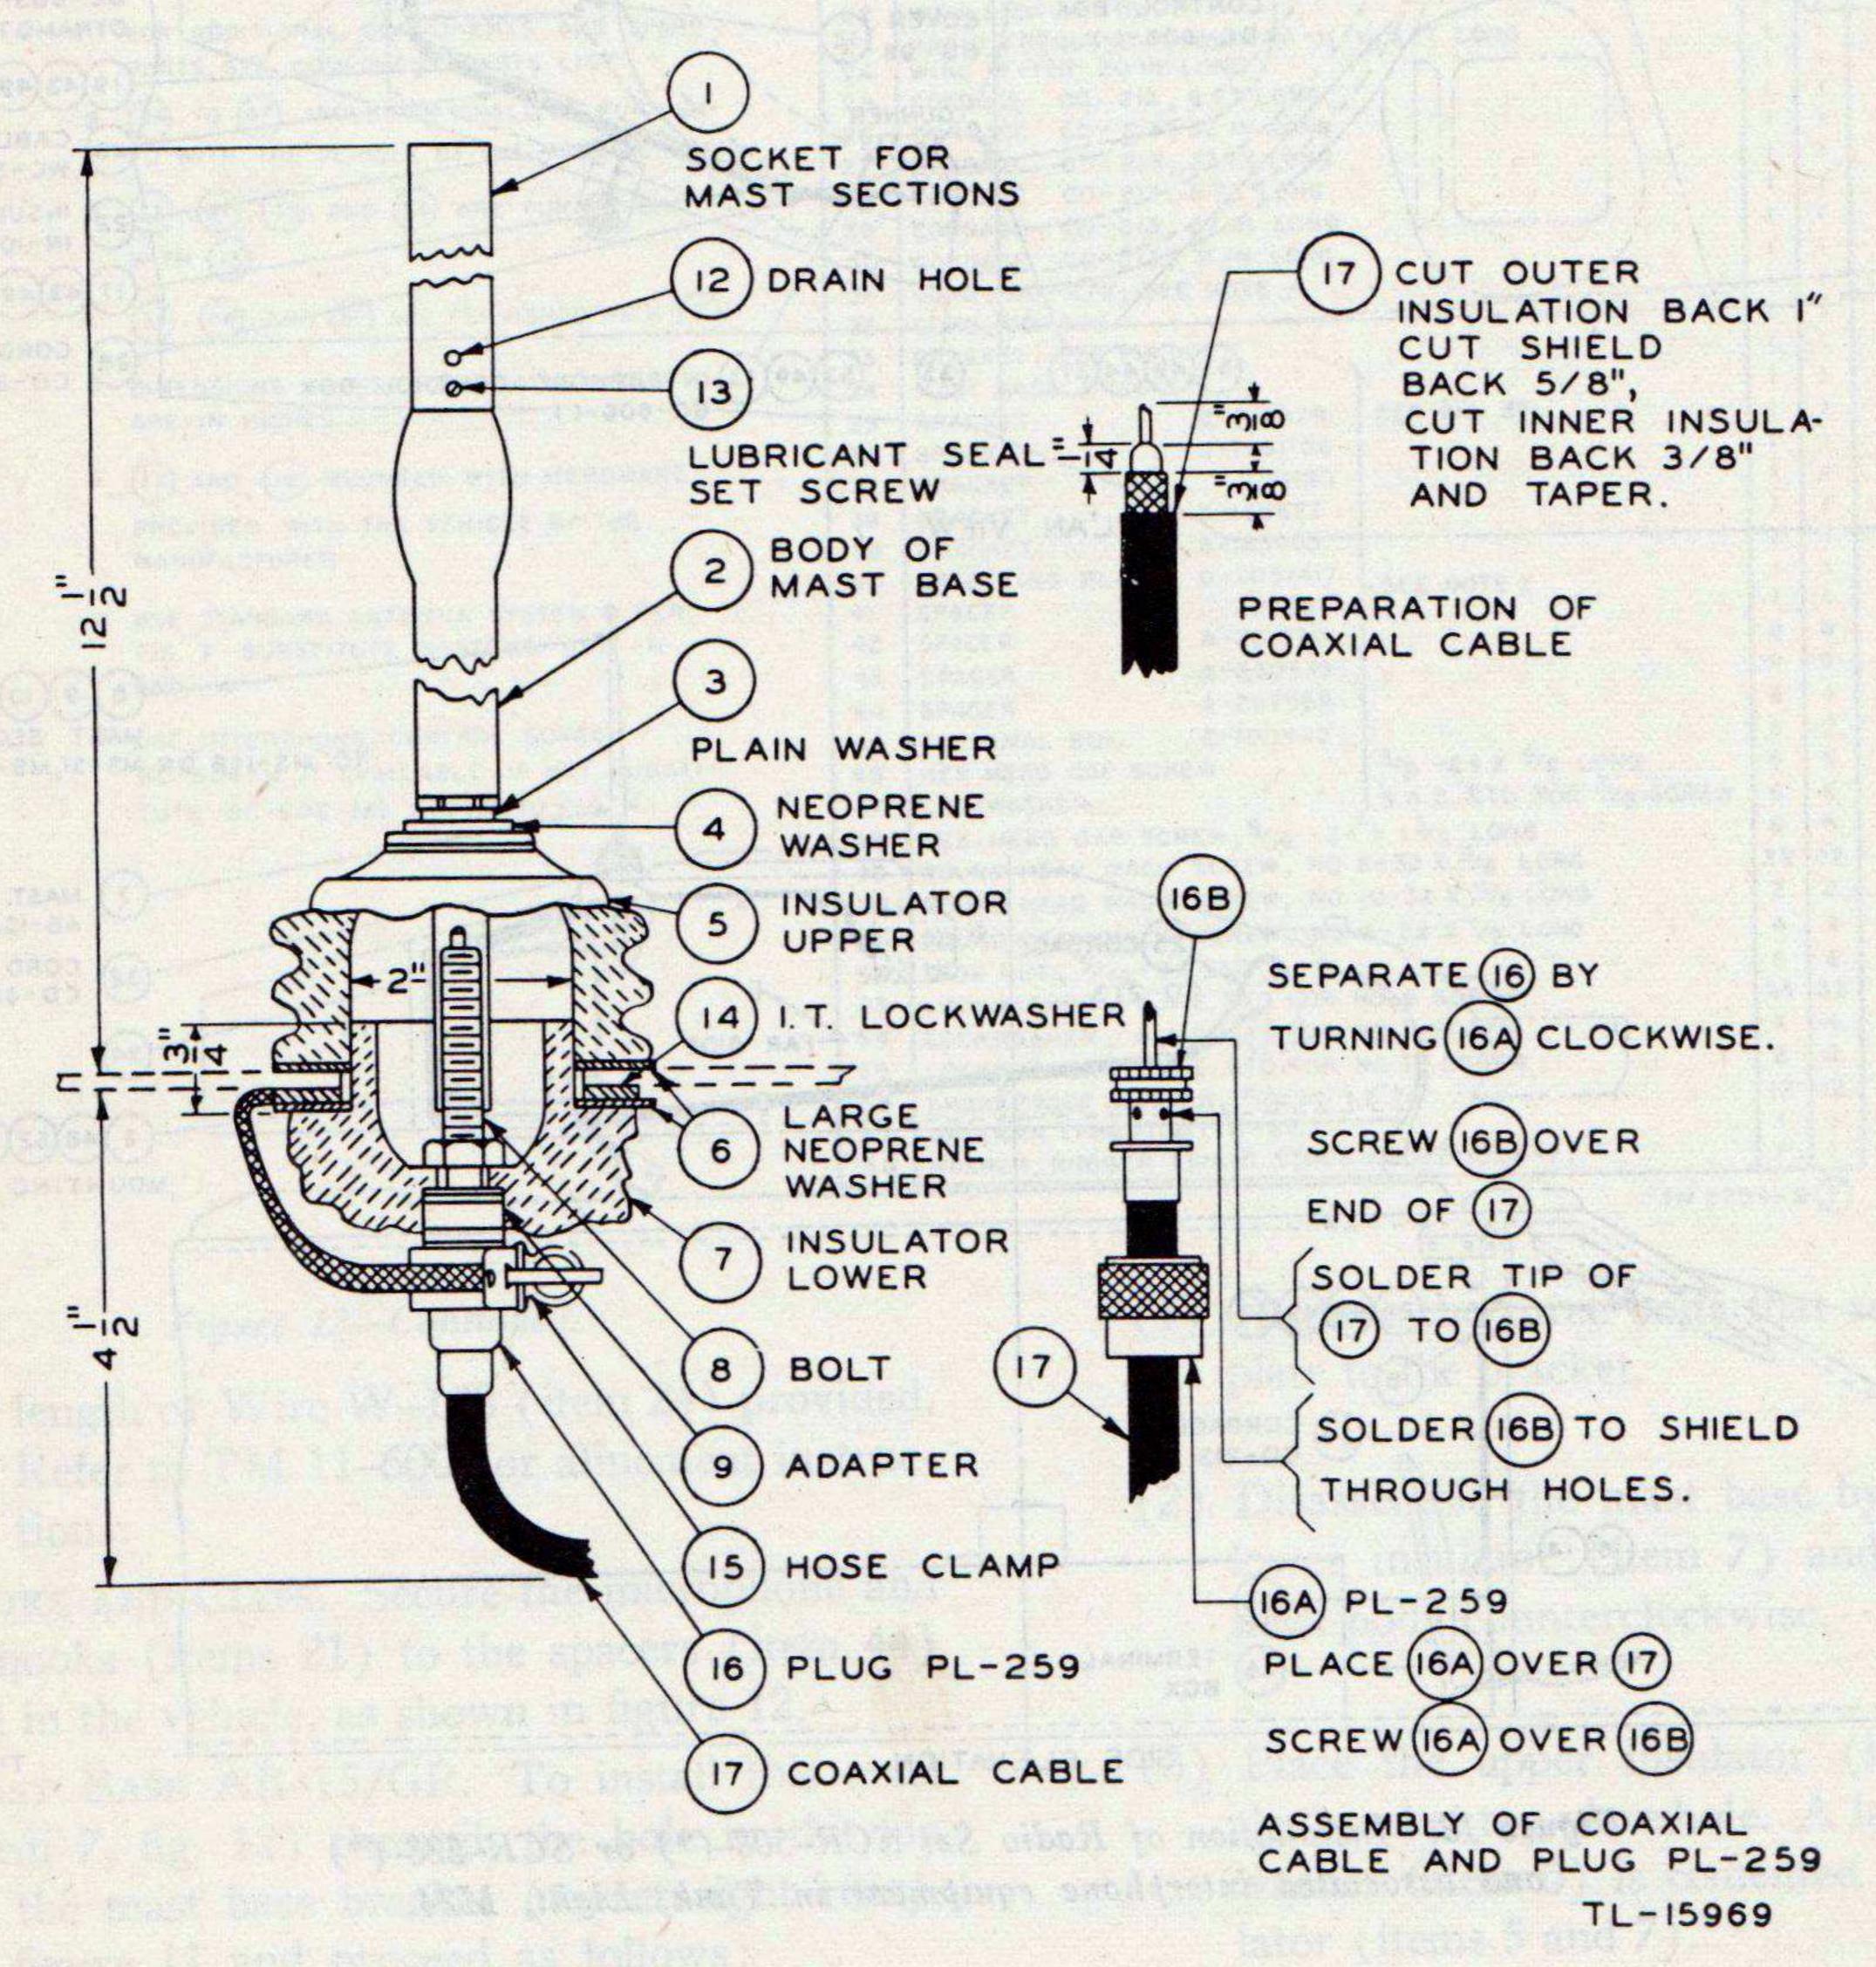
Mast Base AB 15/GR, assembly for coaxial Cable WC-562-().
